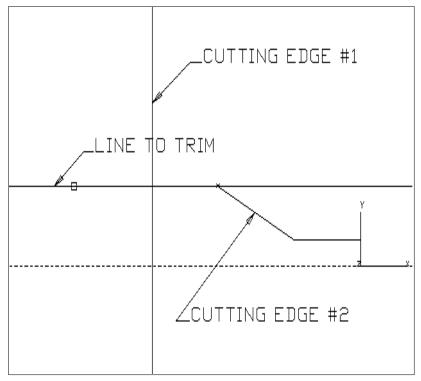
Cutting edges, for trimming the 3 inch diameter
